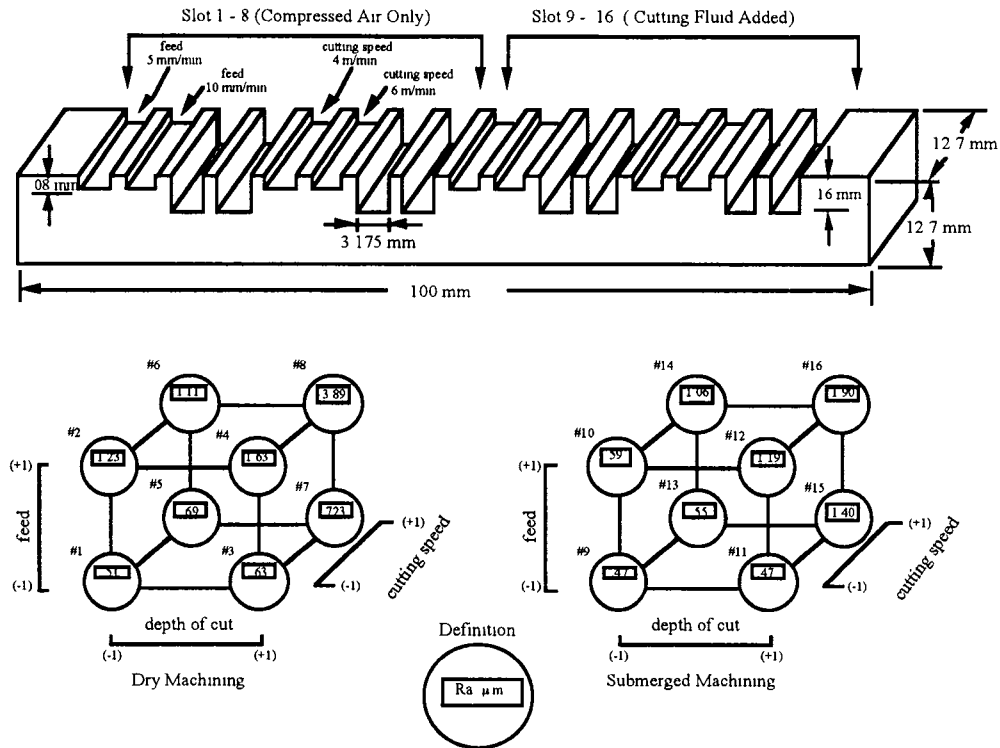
Ceramic Specimen and Setting of Machining Conditions
